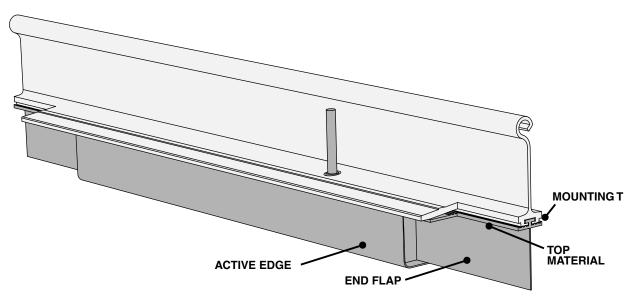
MC271 Sensing edge installed on an extruded aluminum bottom bar
